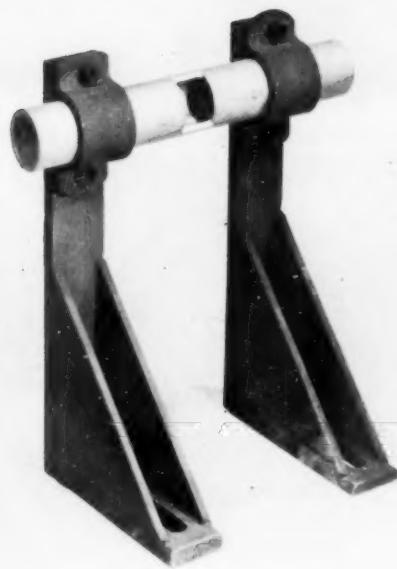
Fixture for wire brushing cylindrical parts. Tube is inclined and parts travel through by gravity. As parts pass opening, they are deburred by a high-speed wire brush. Time of brush contact is determined by tube angle.
